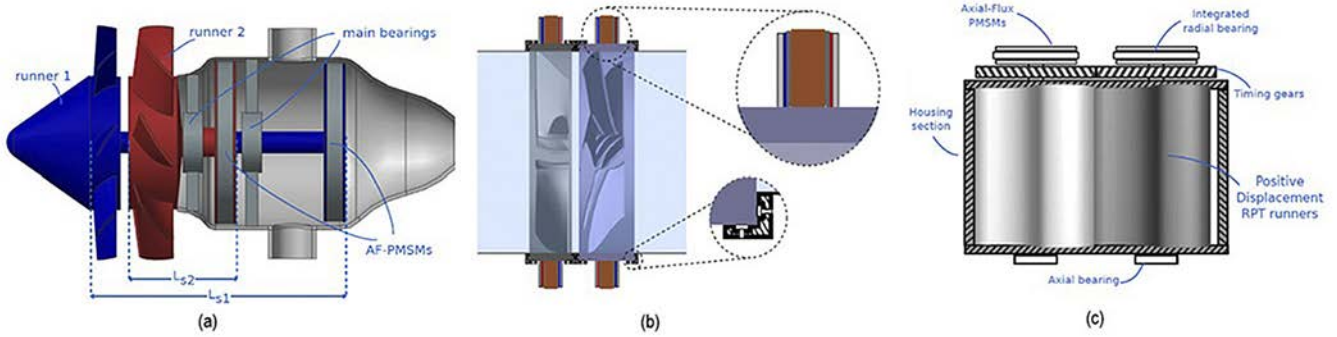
| Power Take-Offs (PTOs) for a) 10 MW shaft-driven contra-rotating reversible pump-turbine b) a 10 MW rim-driven contra-rotating reversible pump-turbine and c) a positive-displacement reversible pump-turbine.
